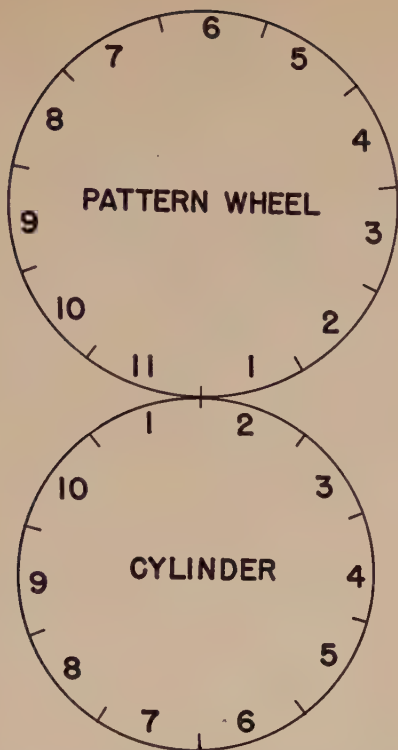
Illustration of a 110-cut jack presser wheel containing 11 pattern divisions, and the manner in which they register with ten pattern divisions on the cylinder of a spring needle knitting machine.
